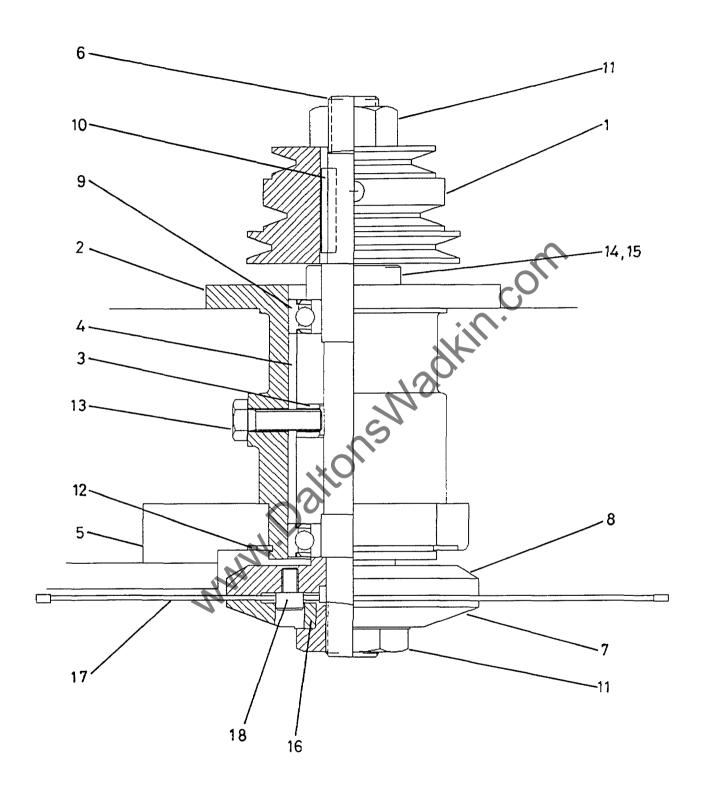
MAIN SAW - SPINDLE ASSEMBLY
